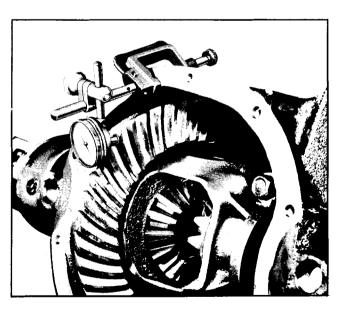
C-22 Checking Ring Gear to Pinion Backlash
